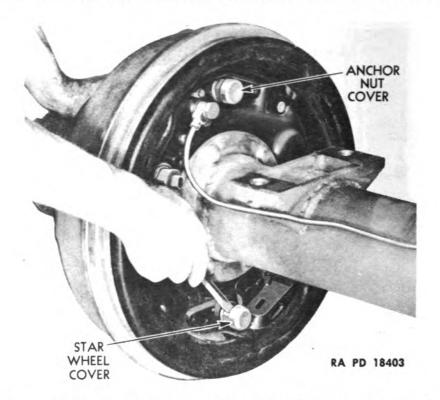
Anchor Nut and Star Wheel Cover - Removal
